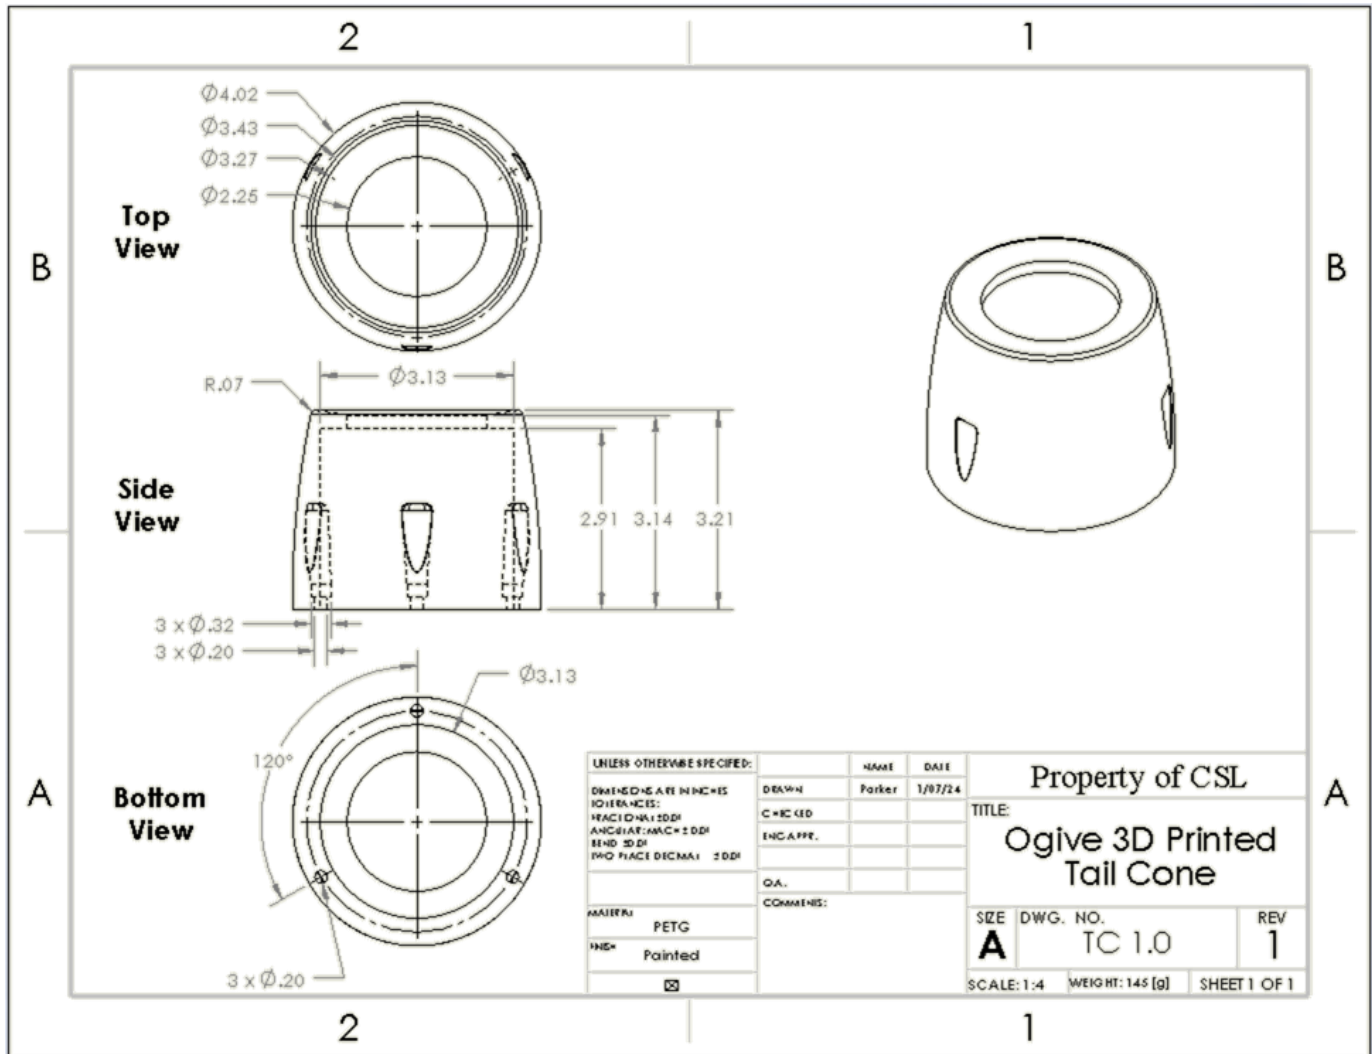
SolidWorks drawing of Full Scale PETG 3D Printed tailcone with dimensions.
